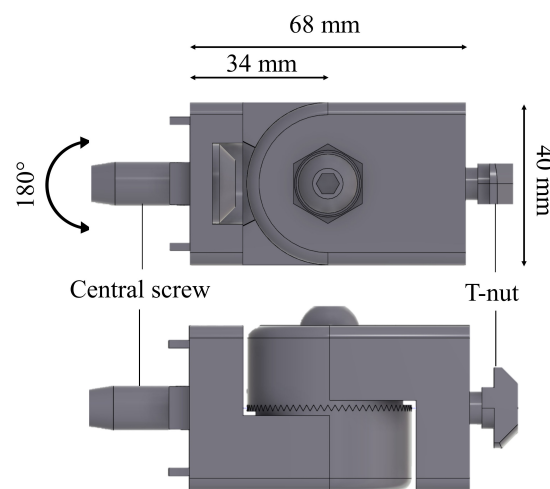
The dimensions and range of motion of the lockable joint from Bosch Rexroth [101]. The upper image is the front of the joint and the lower is the side view.
